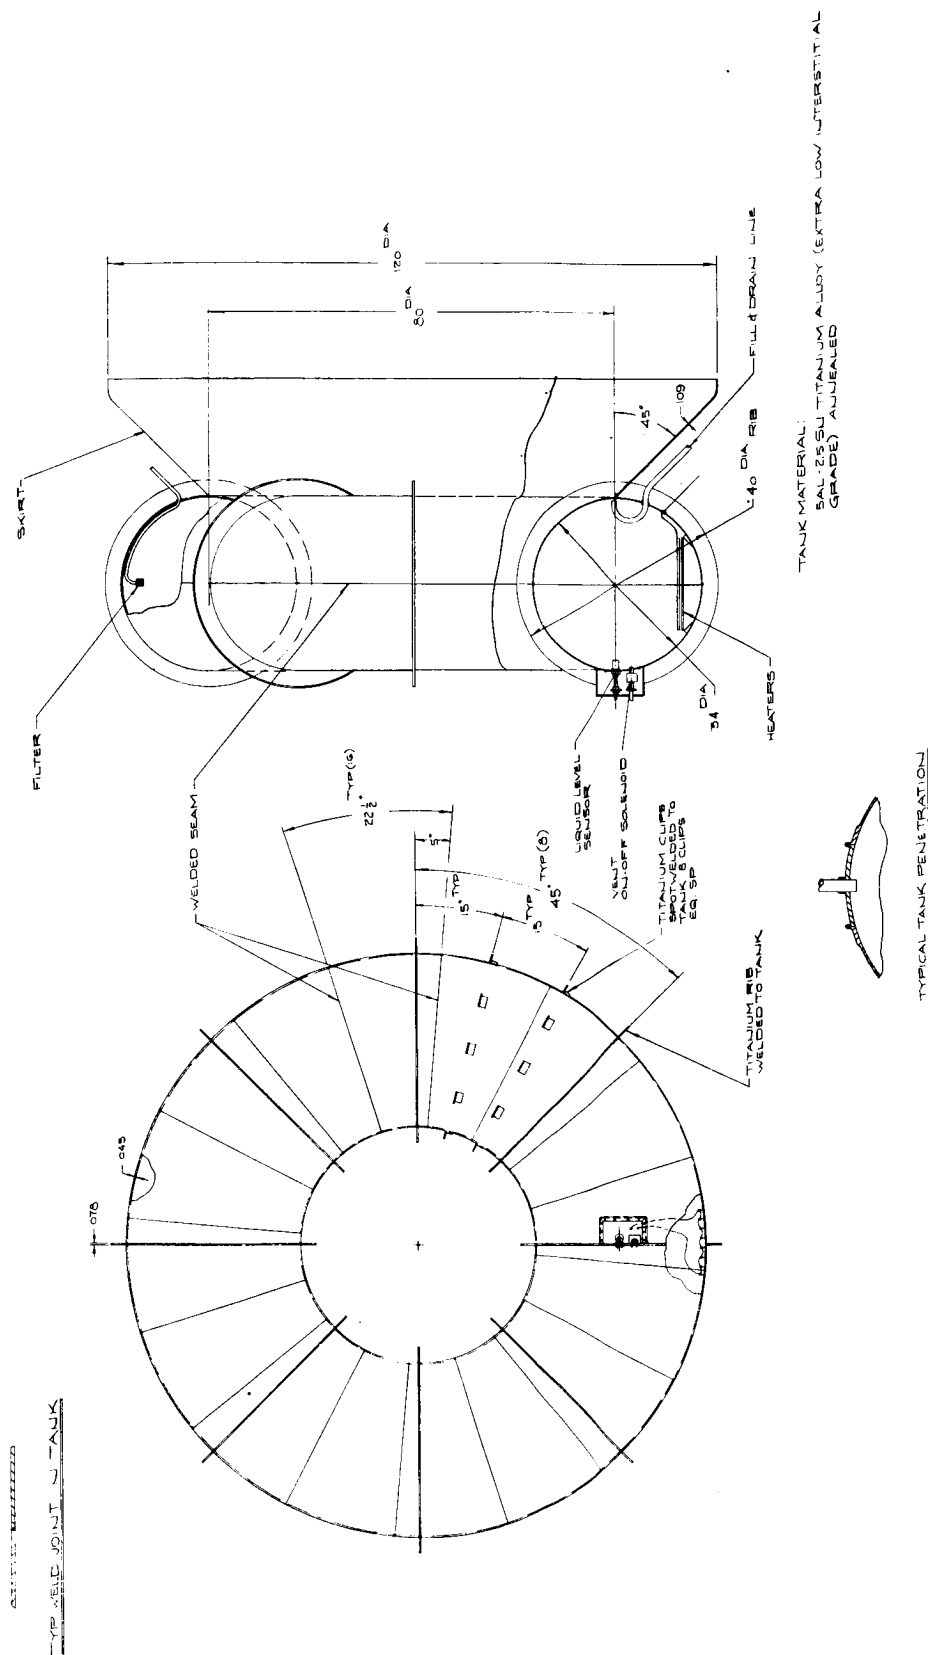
SHELL ASSEMBLY - AMMONIA TANK
